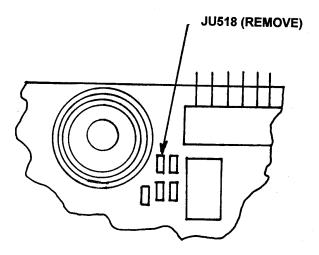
A. COMMAND BOARD - TOP VIEW (EARLIER REVISIONS)
